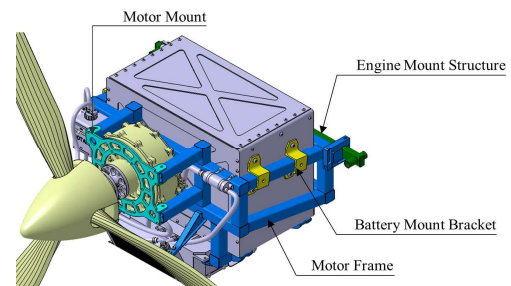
Major Structural Parts of Electric Engine Mounting Frame
